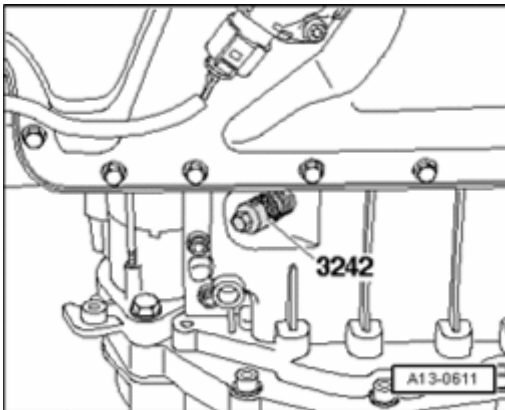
Removing/Installing Crankshaft Holder 3242 Into Hole
